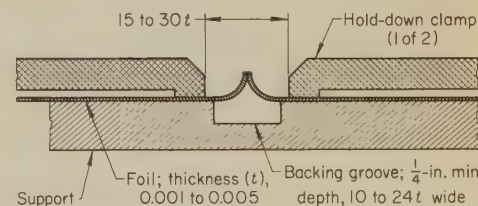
Edge-flange joint, and design and dimensions of fixturing, for plasma-arc welding of stainless steel foil
